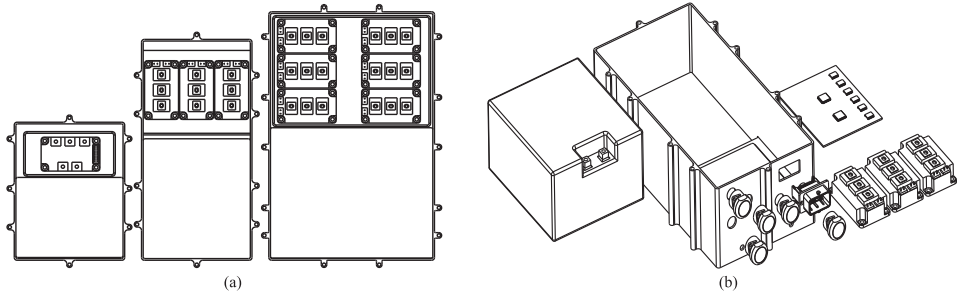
Generic housings and enclosures arrangements. (a) Enclosure layouts for a two-level inverter at various power levels. (b) A generic cast housing together with power modules, dc-link capacitor and control PCB.
